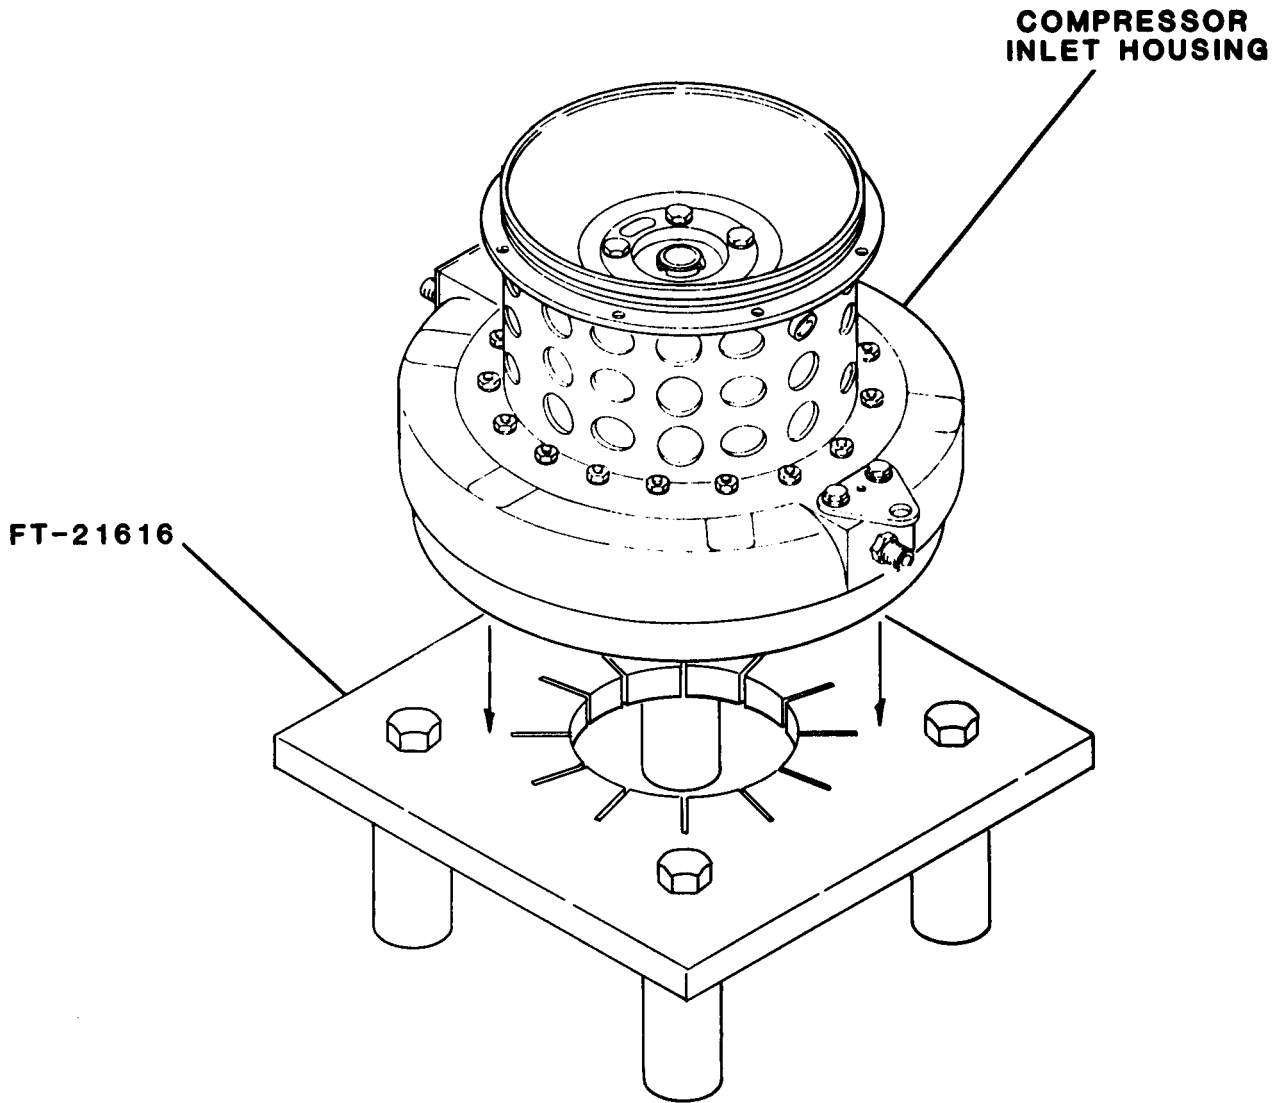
Using Turbine Wheel Assembly Fixture, Fabricated Tool FT-21616
